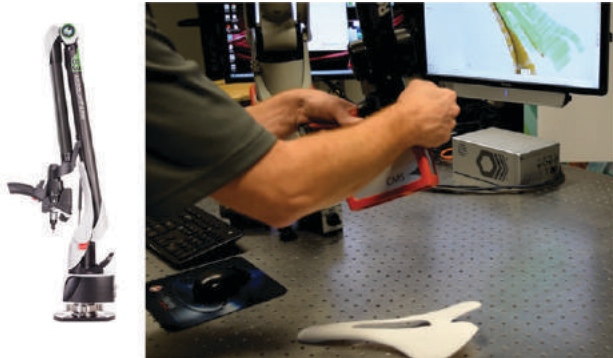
Final inspection of the 3D printed polymer seat part Hexagon Absolute Arm
